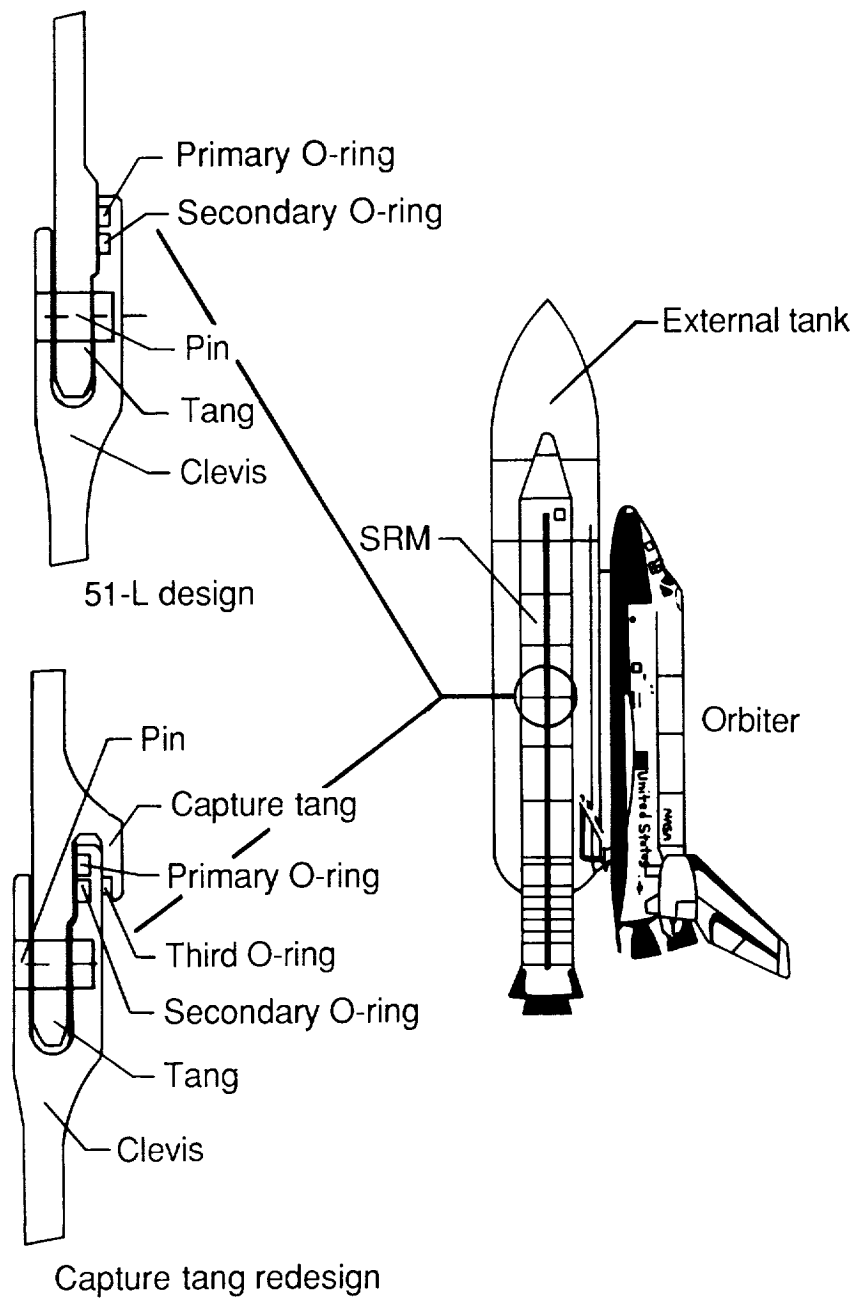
Tang-clevis joints for connecting solid rocket motor case segments.
